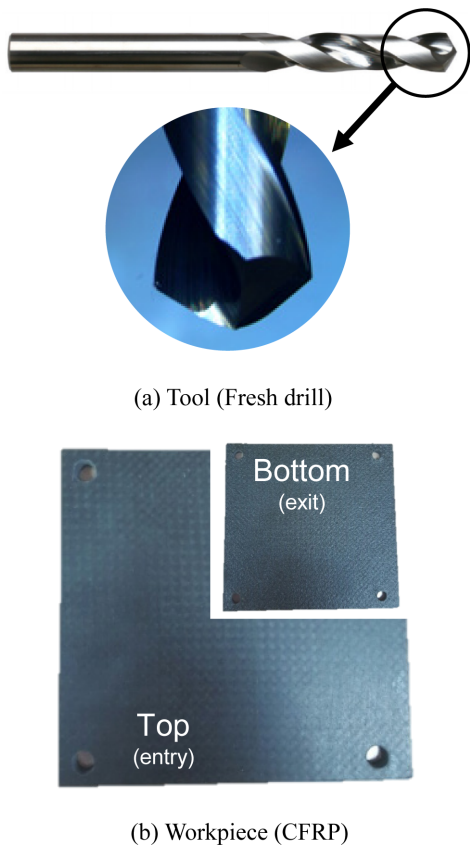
Drilling tool (Drill) and CFRP workpiece used in this study
